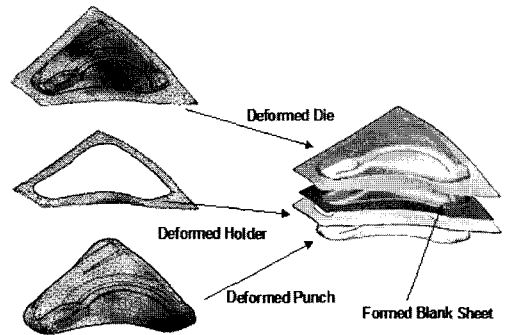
Layout of draw dies for forming analysis based on deformed tools
